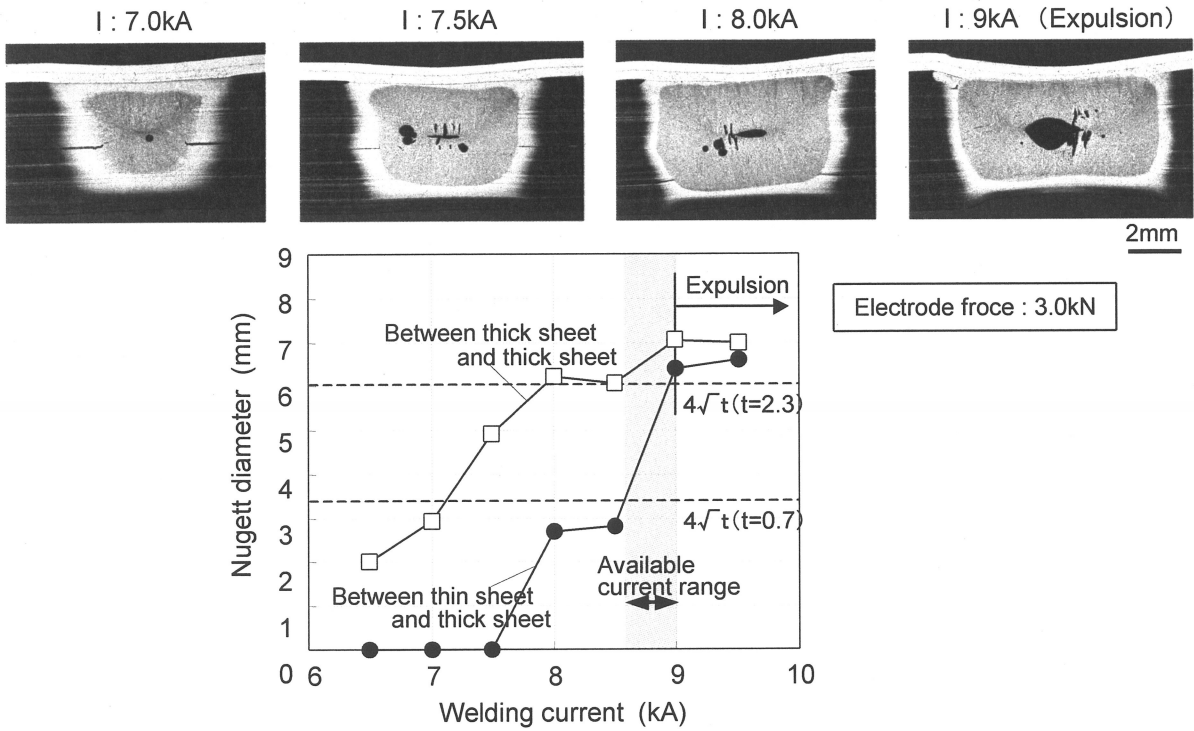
Weld lobe result and cross-sectional macros of resistance spot weld of three sheet joint under constant force (sheet joint: 0.7mmt+2.3mmt+2.3mmt; sheet thickness ratio: 7.6).
